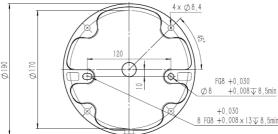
Mounting dimension drawing of the CS612 robot base, with unit of mm
